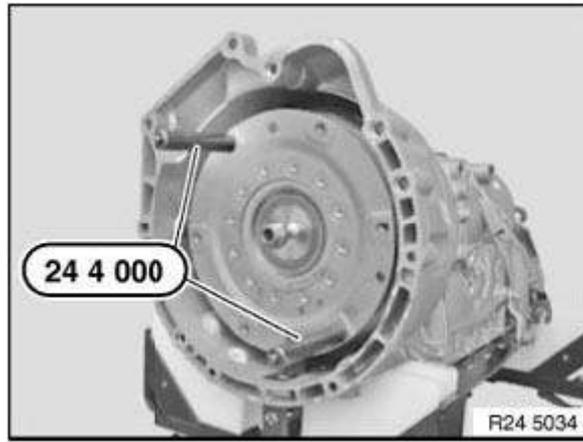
Screwing Special Tool 24 4 000 Into Torque Converter
